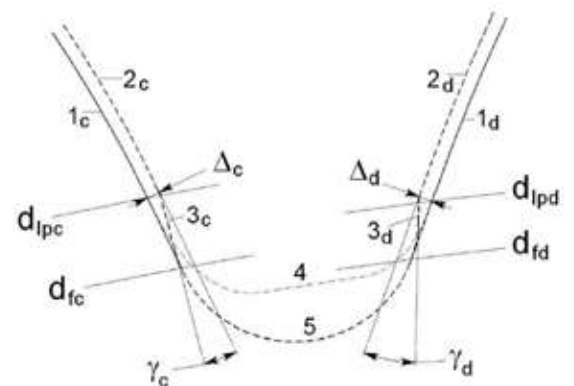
Initial construction of root fillet; 1_d and 1_c — drive and coast final involute flanks after grinding, 2_d and 2_c — drive and coast preliminary involute flanks before grinding, 3_d and 3_c — drive and coast interim involute fillet flanks that will be removed by tooth flank grinding, 4 — trajectory of mating gear tooth tip in zero backlash mesh; 5 — initial tooth root fillet; Δ_d and Δ_c — drive and coast flank grinding stocks; γ_d and γ_c — drive and coast flank interim fillet profile angles; d_{lpd} and d_{lpc} — drive and coast flank lowest contact point diameters; d_{fd} and d_{fc} — drive and coast flank form diameters.
